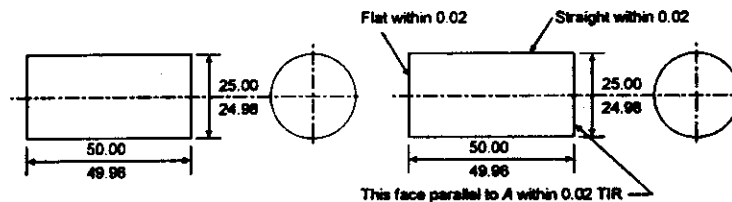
Diagram showing geometric dimensions and tolerances
